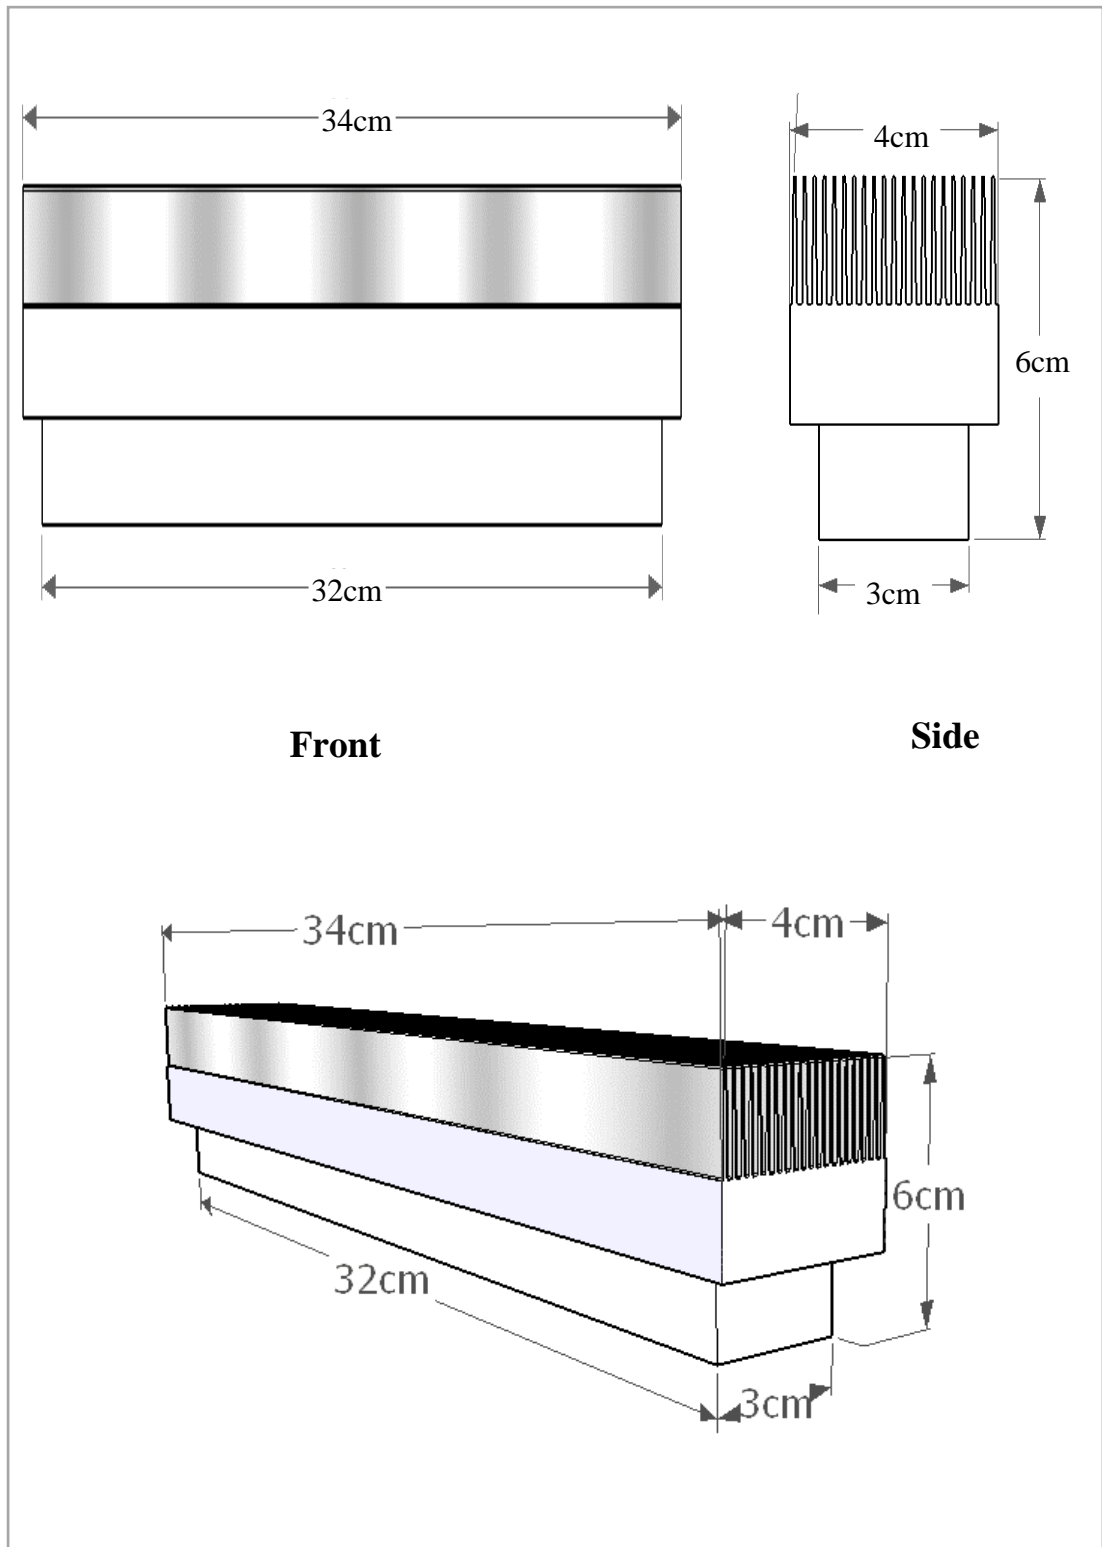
Side, front and 3d views of the Evaporator, Cold Storage and Finned Plate
